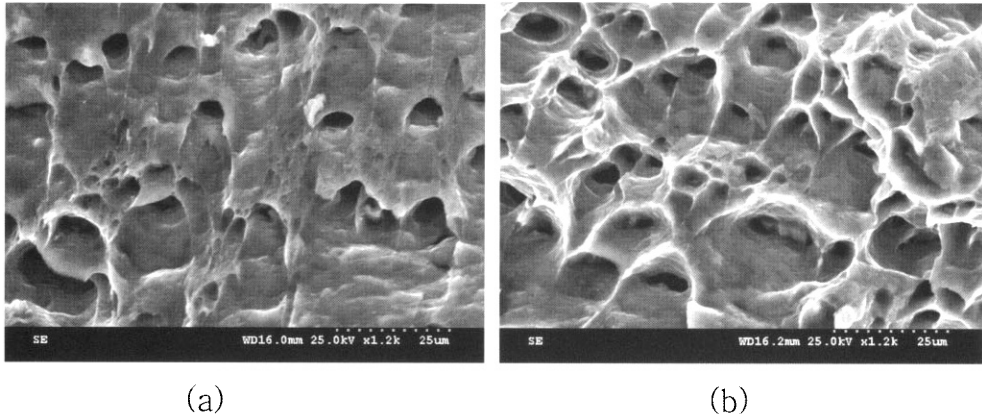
SEM fractographs of tensile test specimen annealed at 520°C for 4hr (a) welds (b) base metal.
